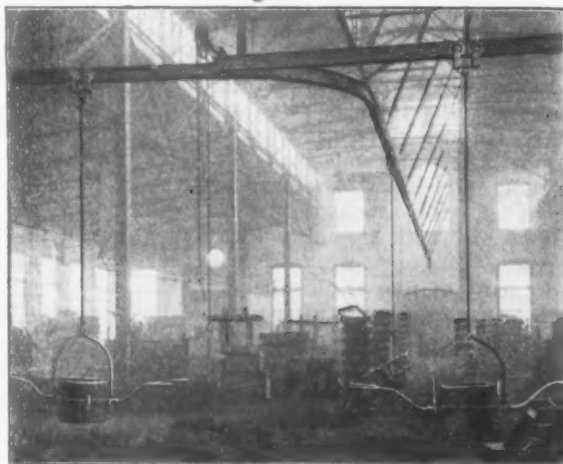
A Bridgeport Foundry. Looking Down the Center.
